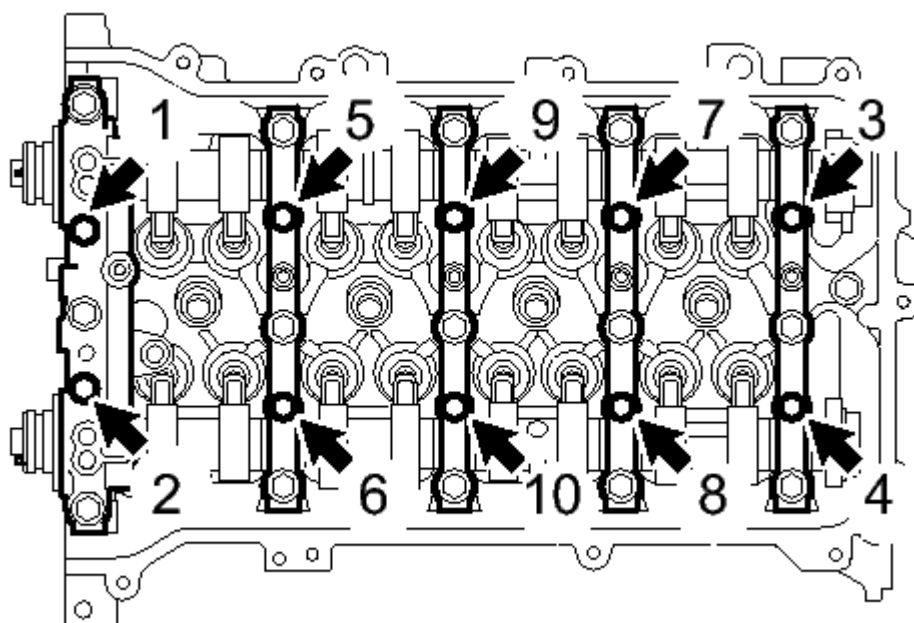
Identifying Bearing Cap Bolt Removal Sequence
